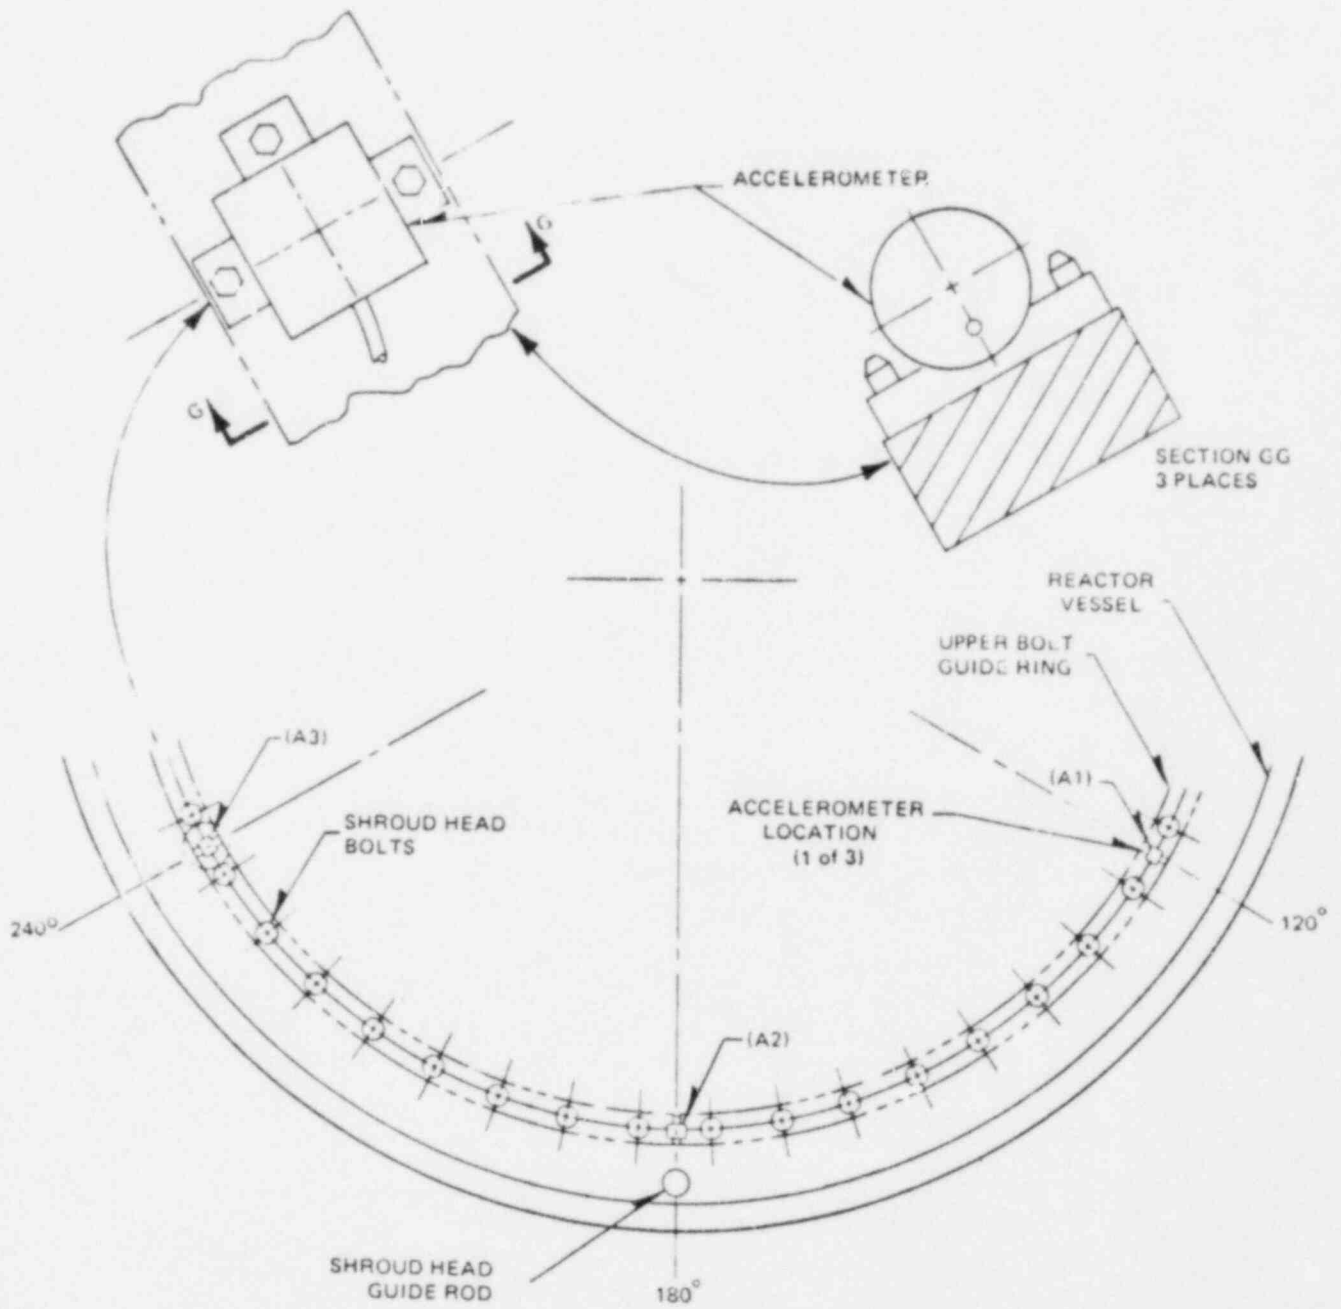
Accelerometer Locations on Upper Bolt Guide Ring.
